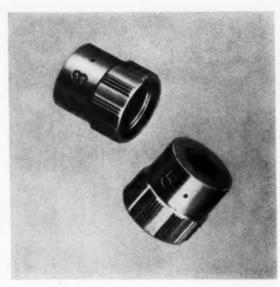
Complex safety-razor part that is completed in thirteen operations on a single six-spindle automatic bar machine.
